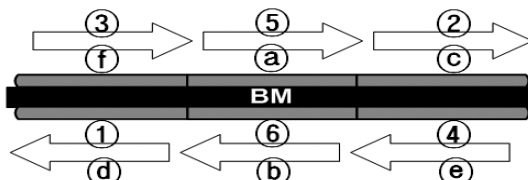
Schematic of symmetric welding (fillet welding)
